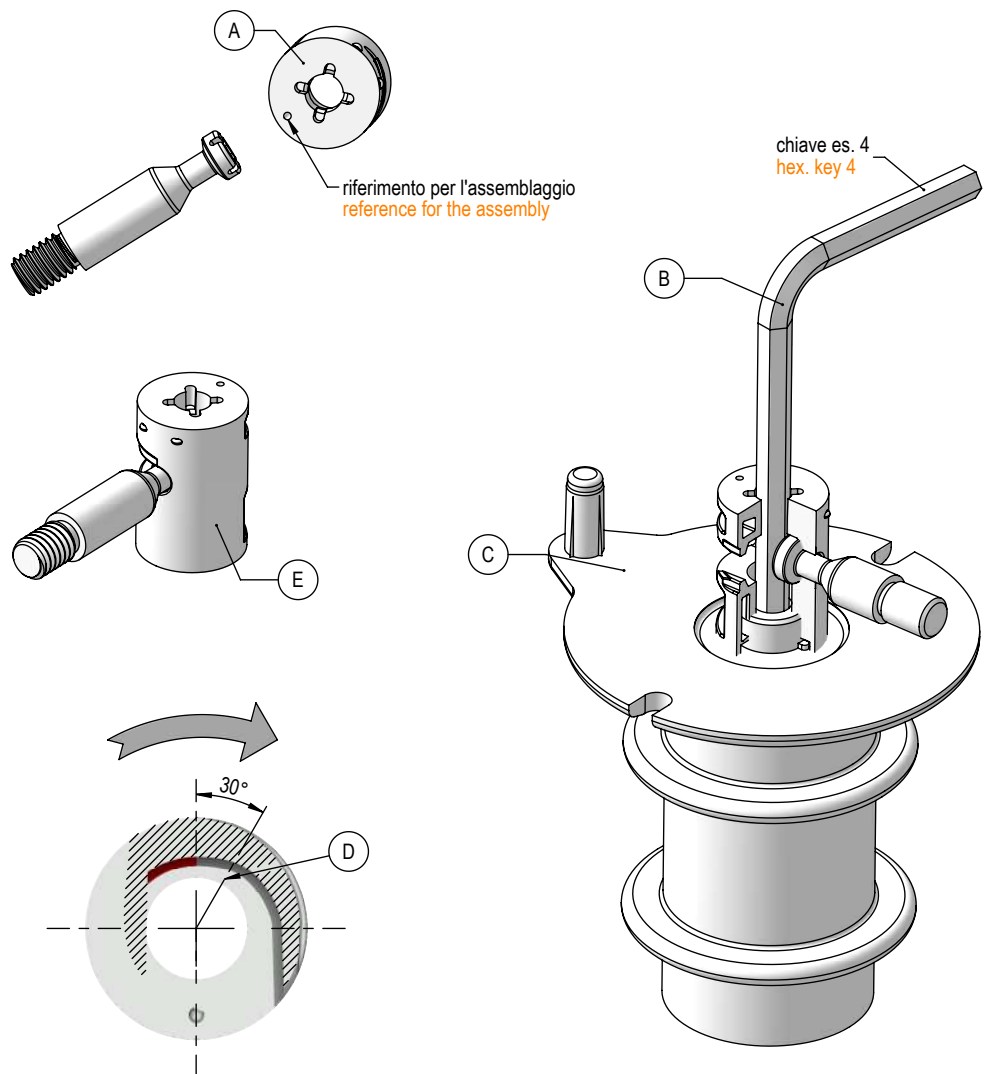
DETAIL A: ECCENTRIC HOUSING CHARACTERISED BY HAVING A THROUGH HOLE THAT ALLOWS THE PASSAGE OF AN HEX. KEY 4.
